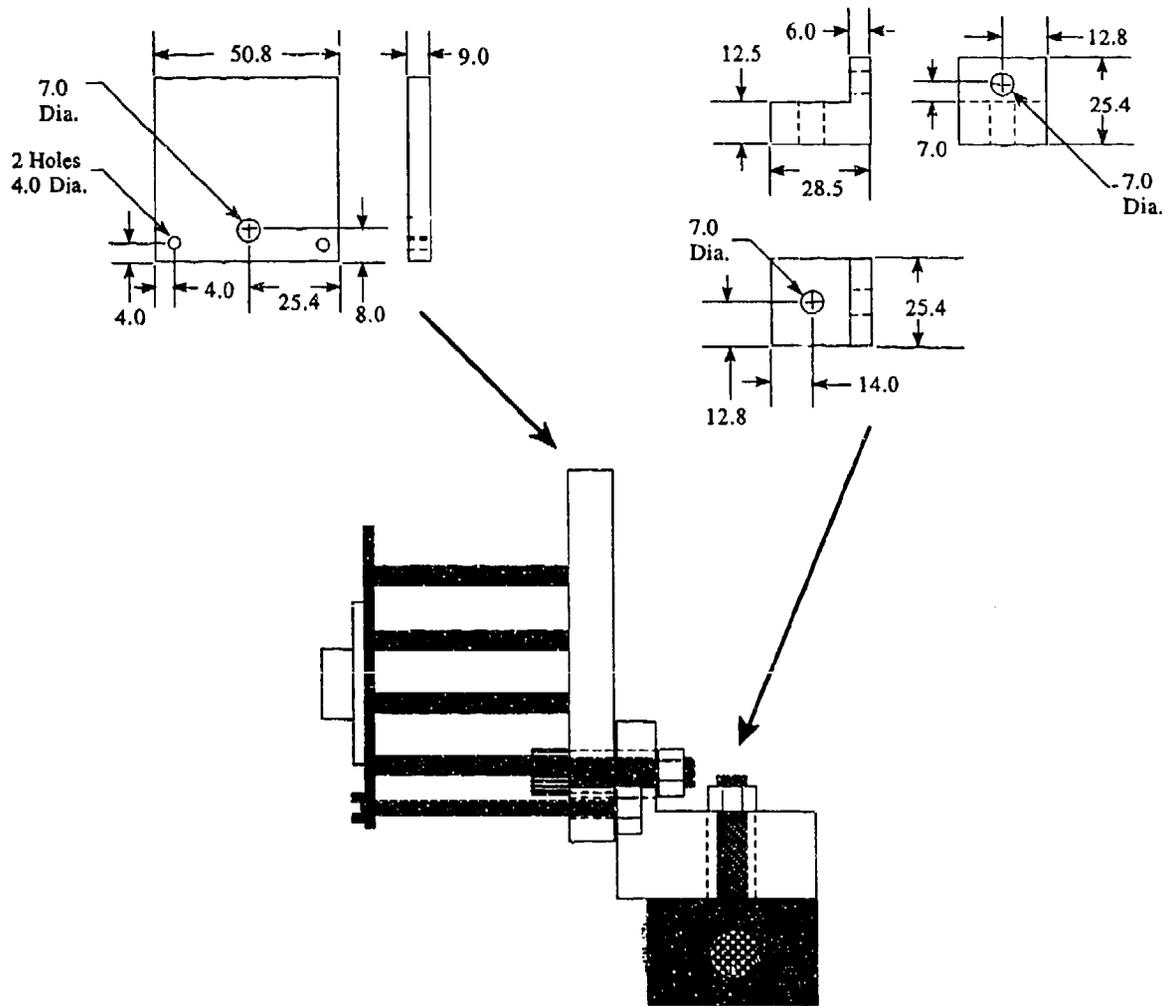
Custom fabrication drawings for item #13, heat sink assembly.
